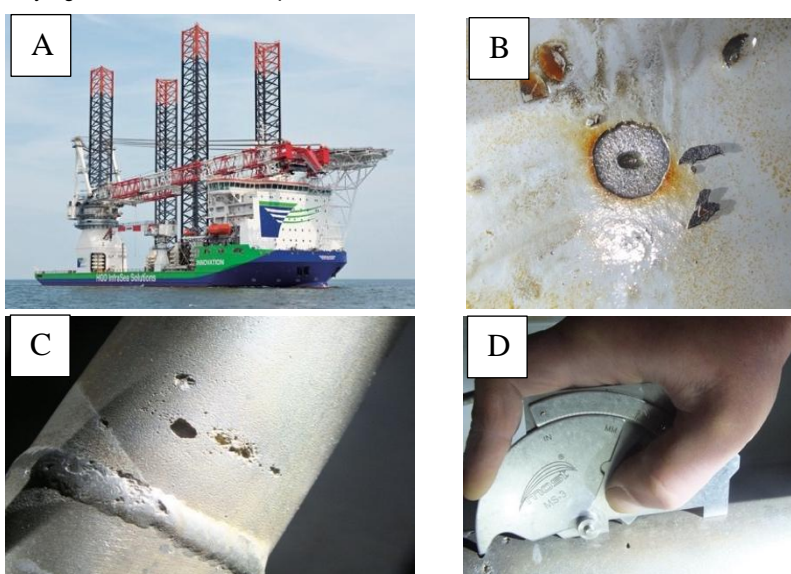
(A) 'Innovation' vessel in the North Sea, (B) Open blister of anticorrosion coating at the bottom of a ballast tank with a deep crater caused by undercoating corrosion, (C) Pitting corrosion of 304 steel coils, (D) Measurement of pit depth.
